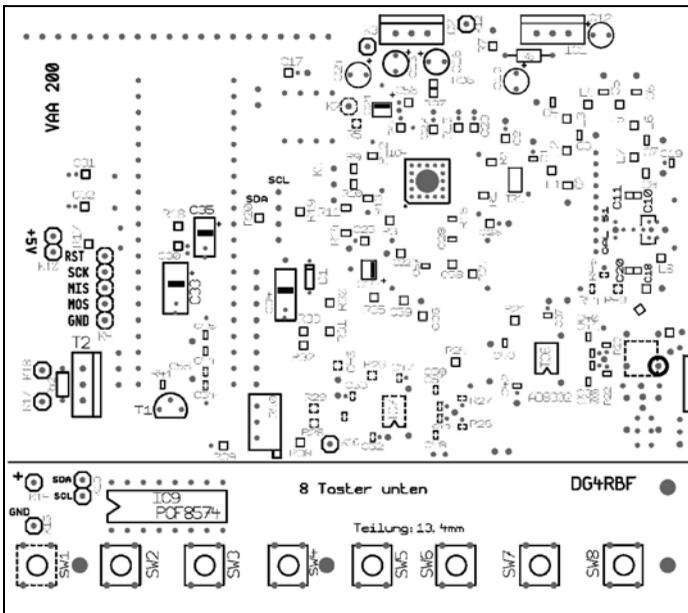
Component layout for the track side of the vector analyser PCB showing the SMD components.
